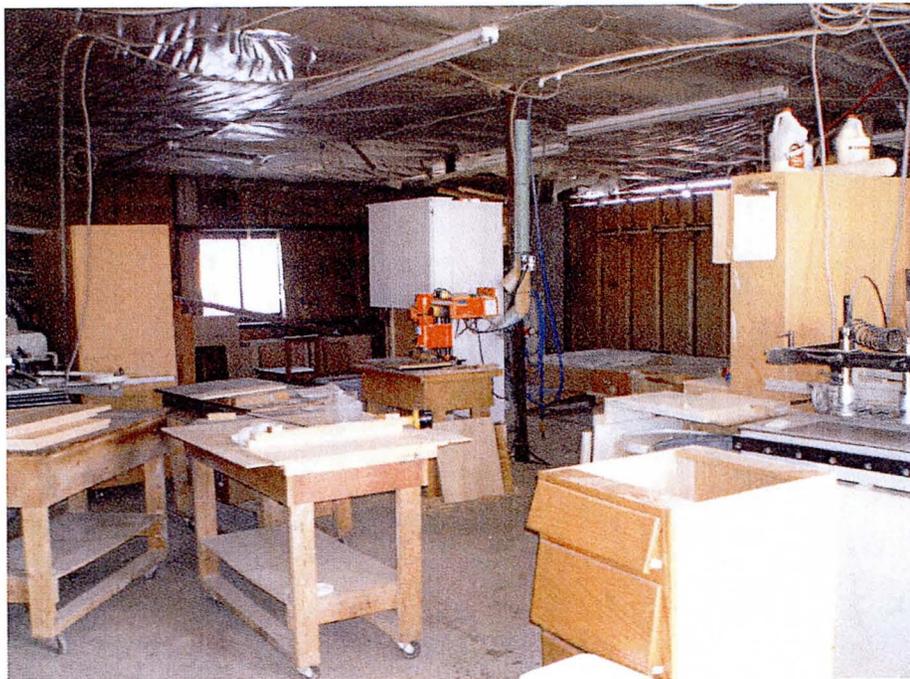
View within the furniture shop building on Parcel 014Z of the Site.
